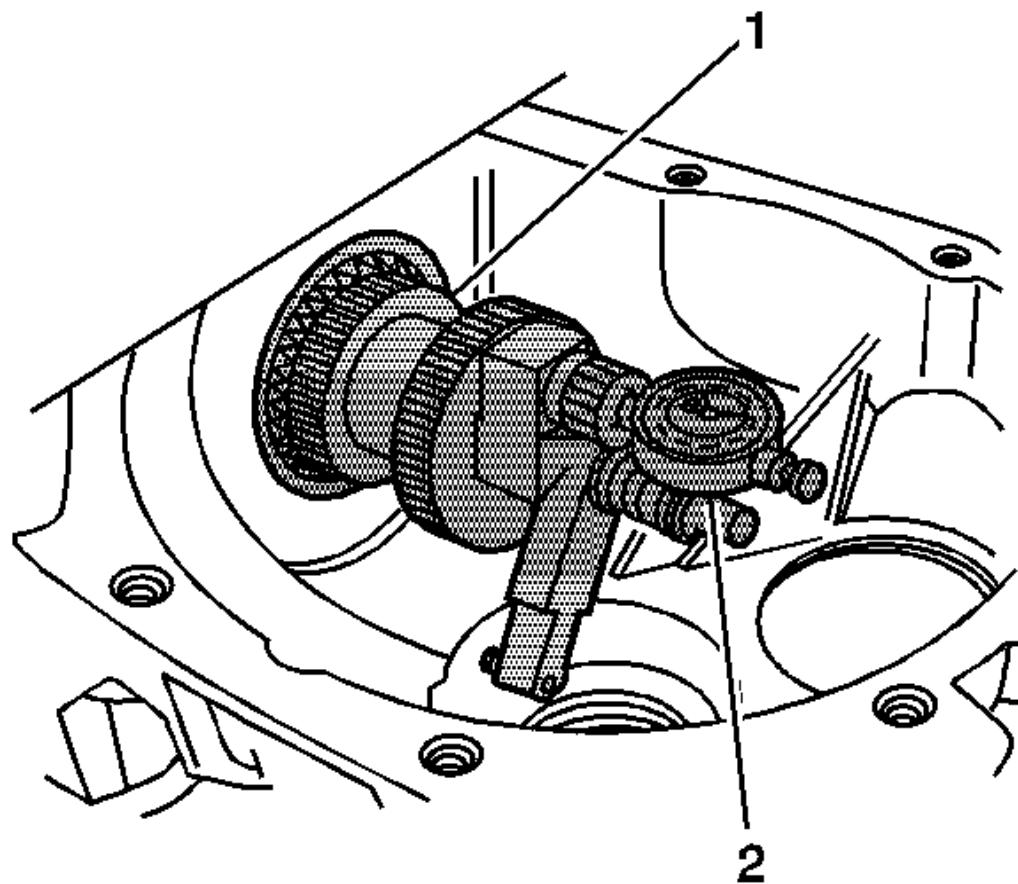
View Of J 36601-3 & J 29763 In Differential Side Bearing Bore
